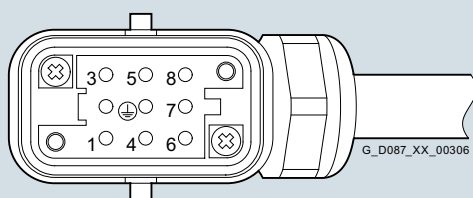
/26 Pin assignments for motor plug with 0.5 m cable, plug insert rotated by 180°
